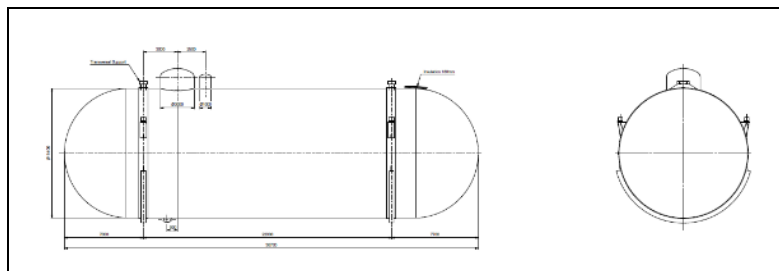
Cargo tank Principal Arrangement (side and front view)
